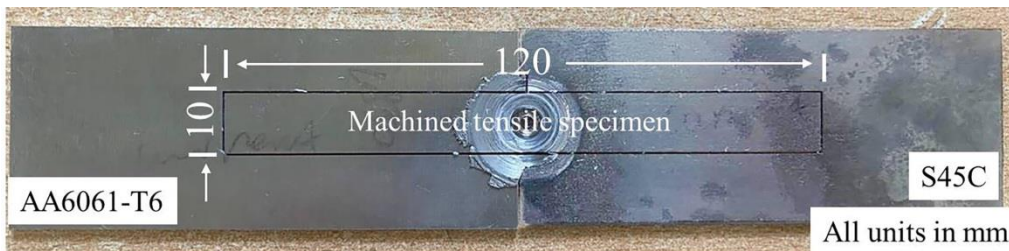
Dimensions for a tensile specimen from a butt FSSW joint
